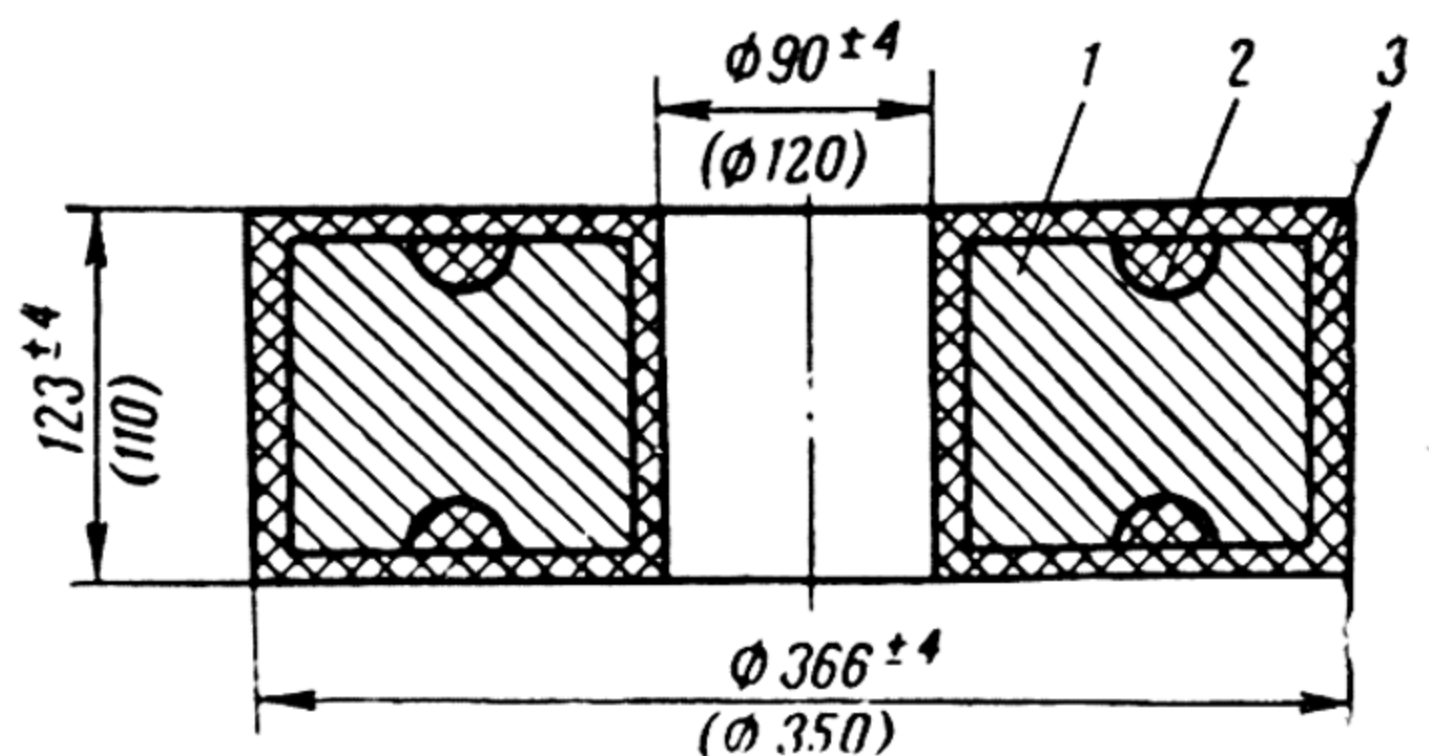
Forging drawing of a gear blank: 1) contour of gear after machining; 2) forging allowance; 3) contour of gear blank forging
